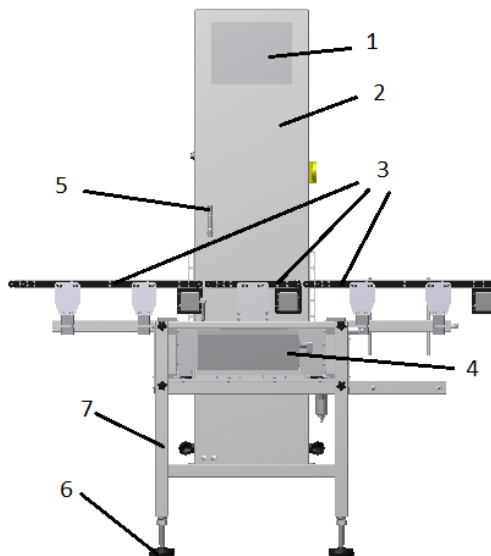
Checkweigher design: 1 – control panel, 2 – control cabinet, 3 – conveyor belts, 4 – weighing module, 5 – optical sensor, 6 – vibration damping element, 7 – main structure
